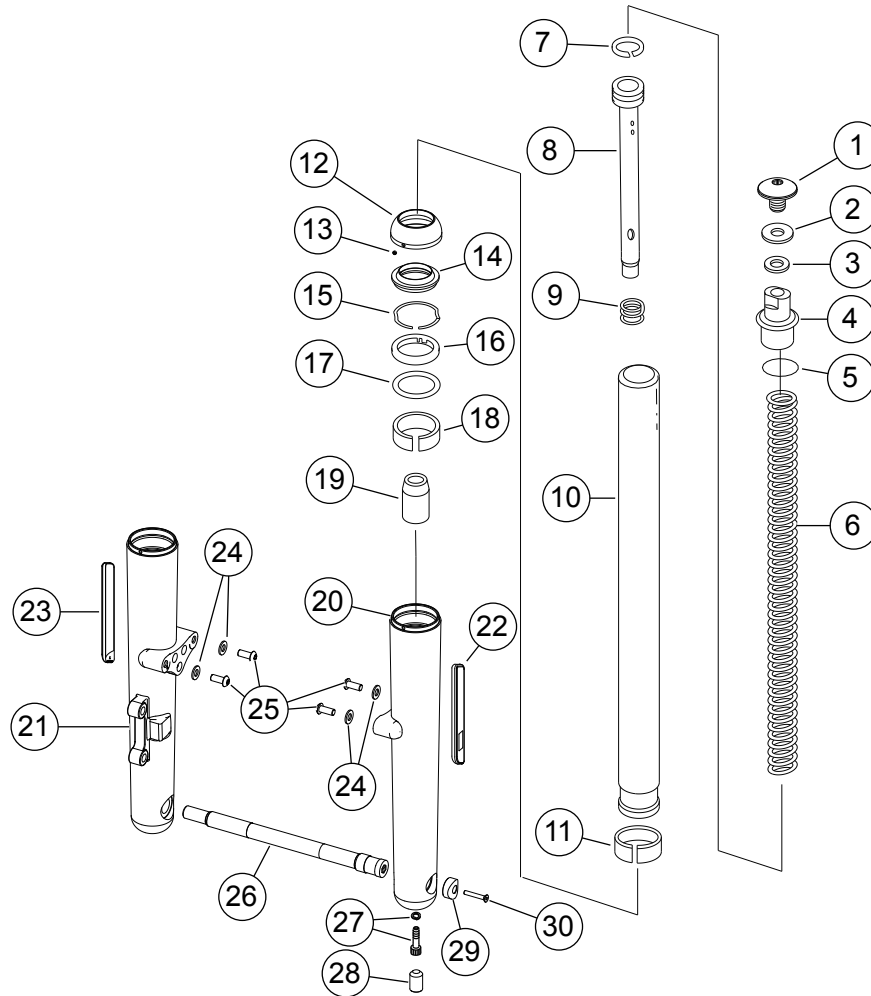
Service Parts for Chrome Front End Kit (Front Forks and Axle)
